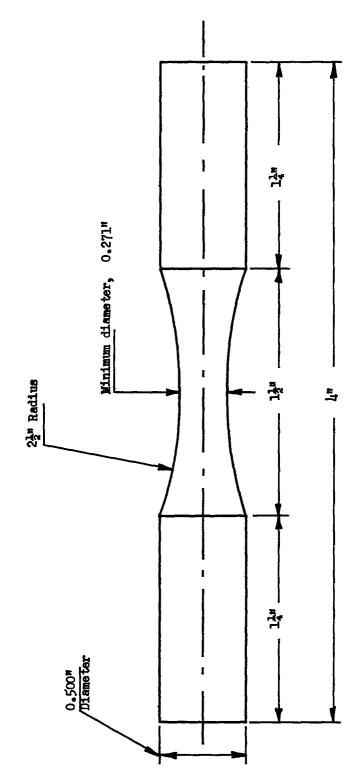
Dimensions of $\frac{1}{2}$ -inch-diameter rotating-beam fatigue specimen.
